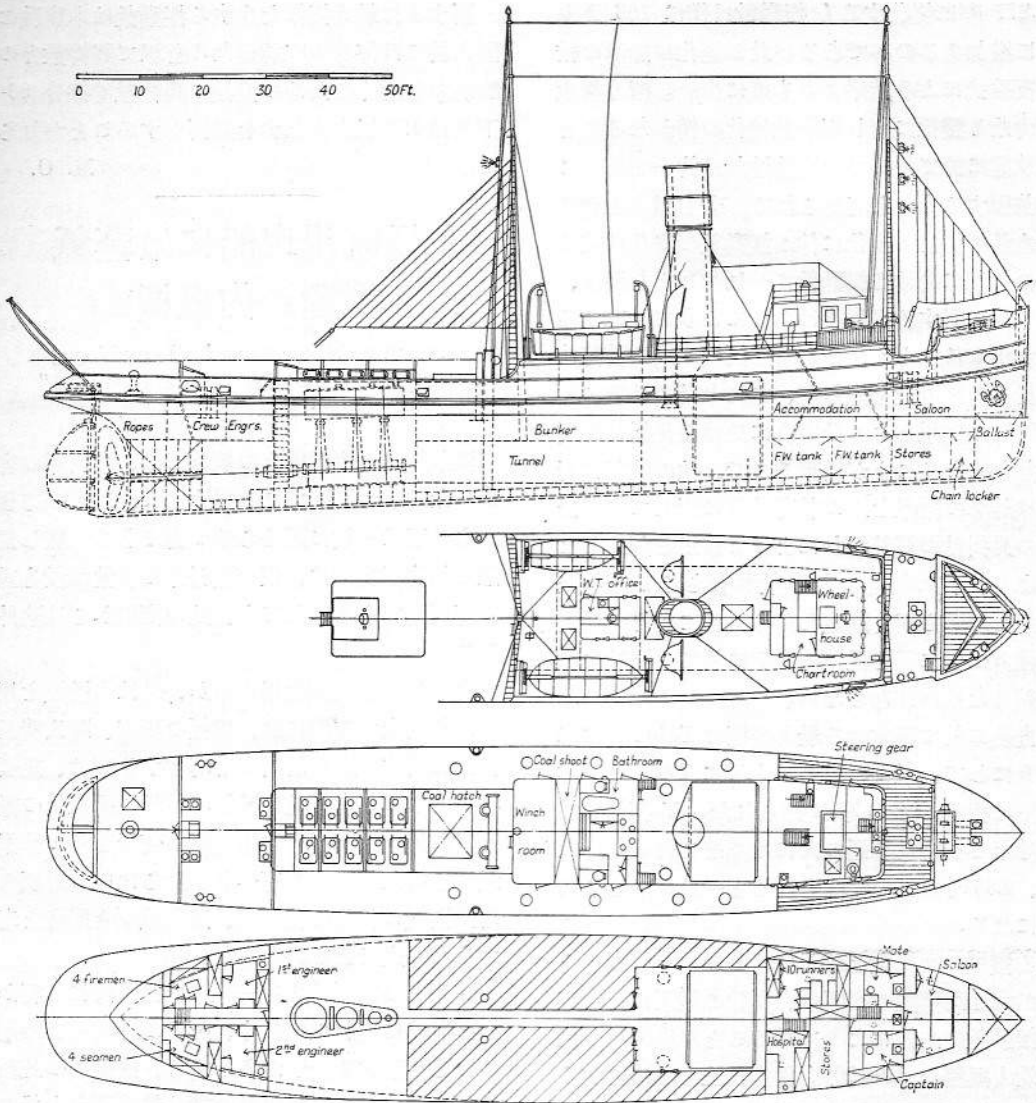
Sea-going Single-screw Steam Tug of 850 I.H.P.
